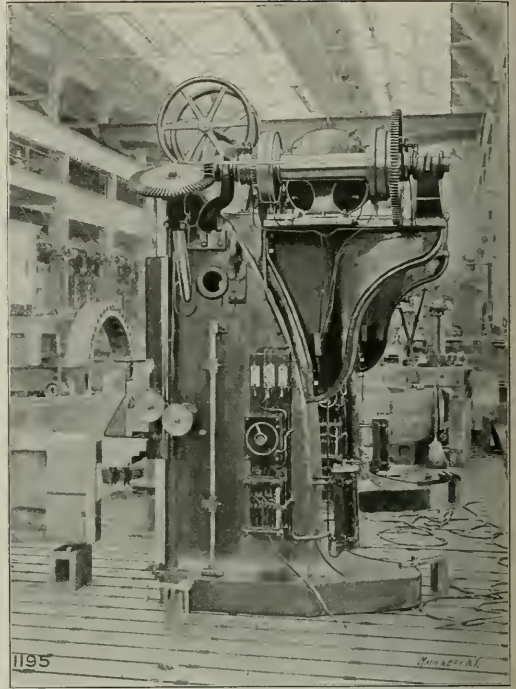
Side View of Worm-and-rack Driven Slotter, showing Motor Drive and Magnetic Clutches.
